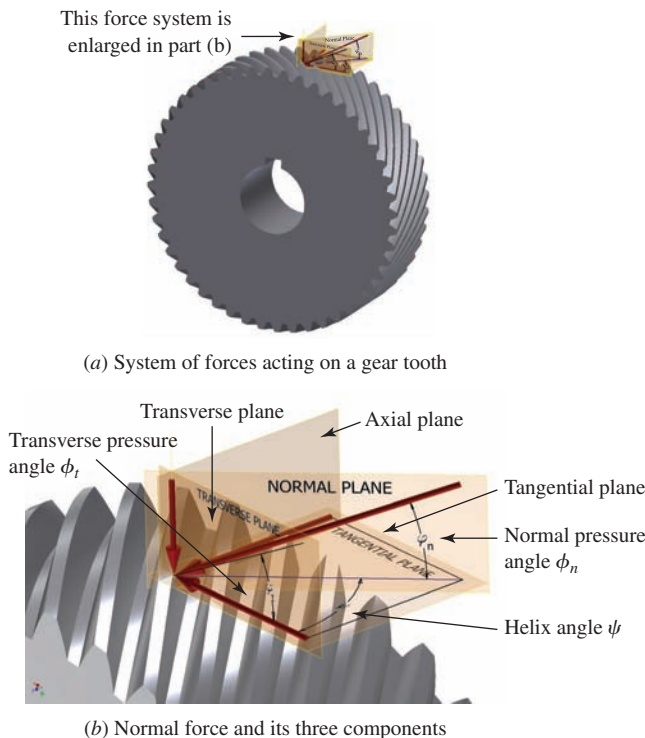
Helical gear geometry showing forces acting on gear teeth
